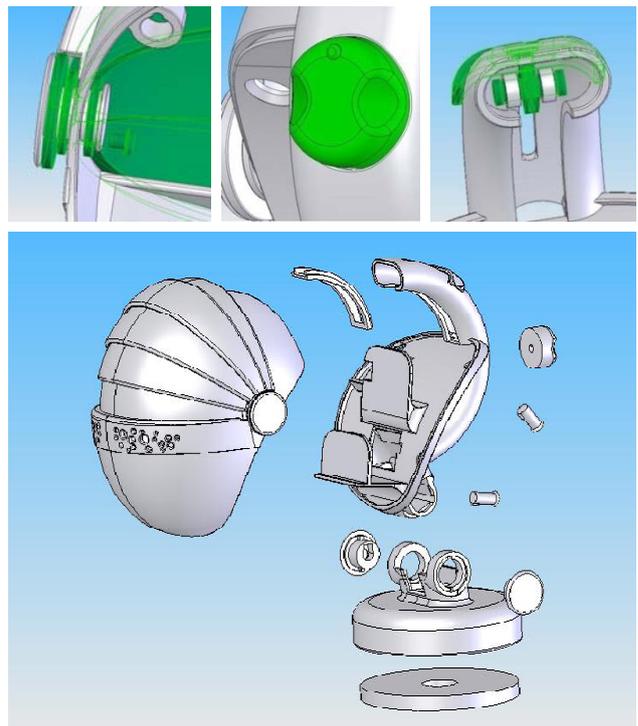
The 3D modelled additional features and an exploded view of all the separate components.
